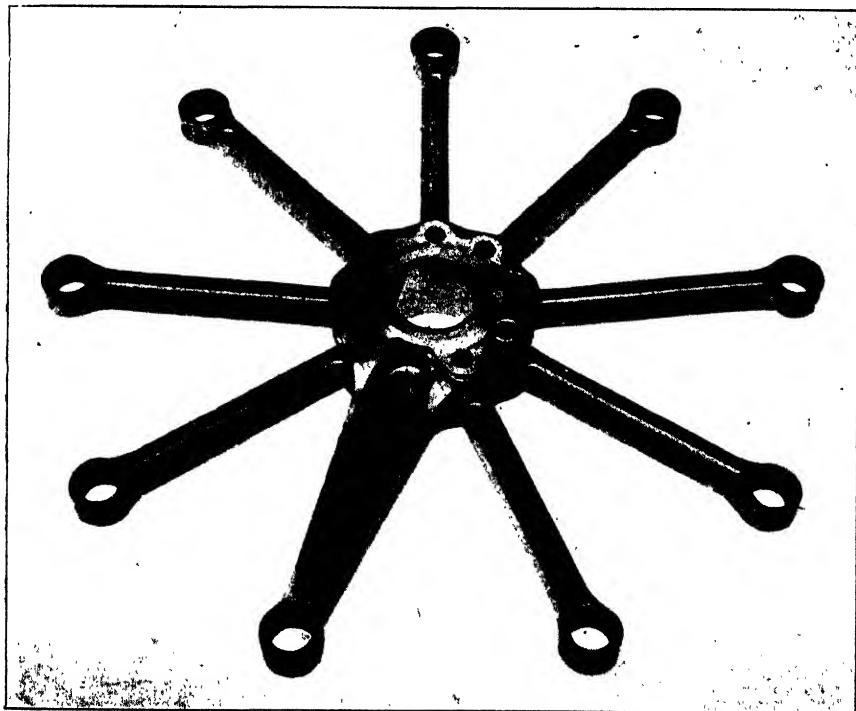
Connecting Rod Assembly with Floating Bush and Oil Retainer.
